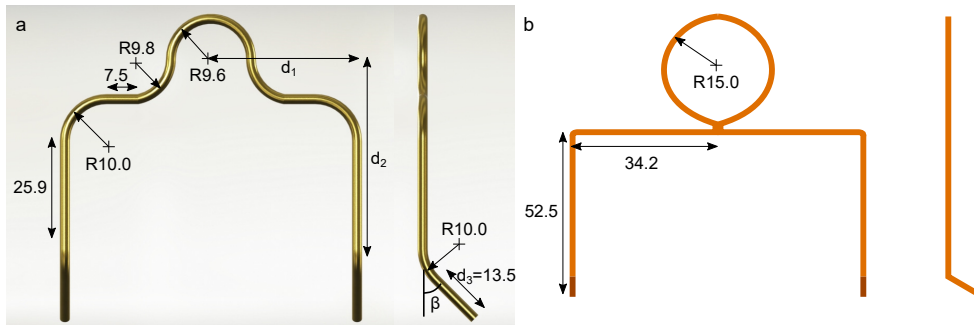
(a) Dimensions of the brass tubing legs. (b) Average dimensions of the copper wire legs. Dimensions are given in mm.
